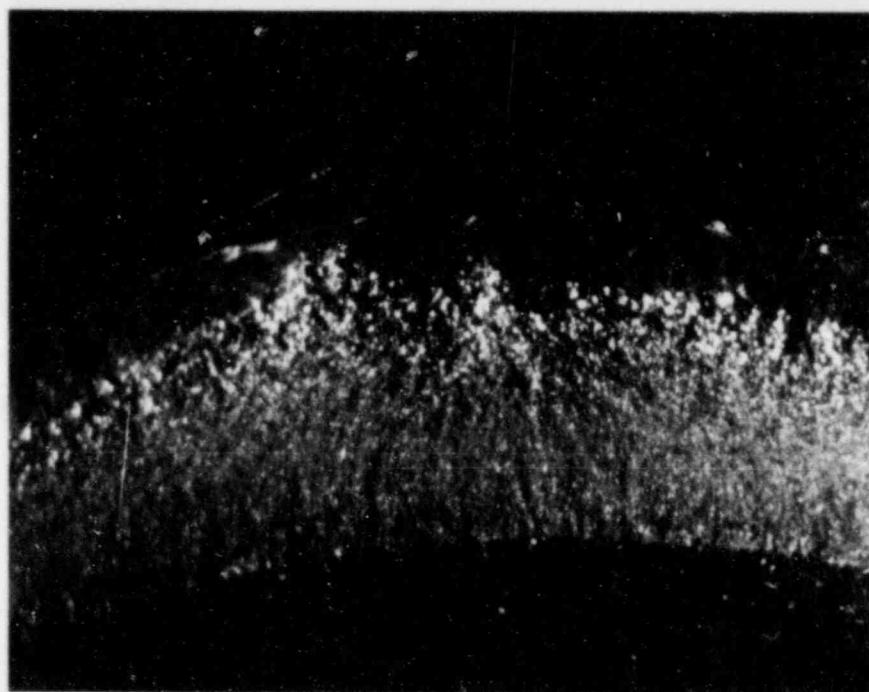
Fracture Surface of Specimen C8.
